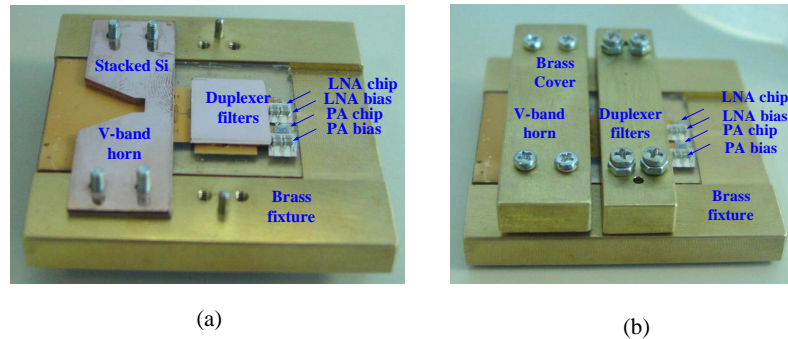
(a) Integration picture after duplexer cover is bonded and bulk-micromachined horn upper half is assembled. (b) Final assembled circuit with the aid of a brass fixture
